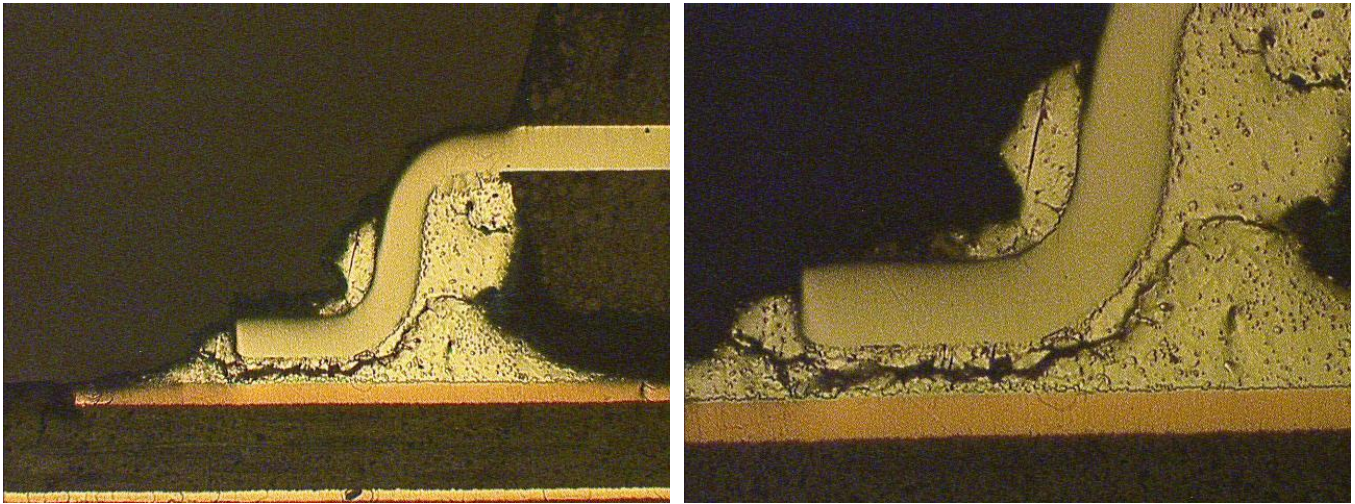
TSOP-50 Solder Joints, Board 107, Component U61, SN100C/Sn, Failed @ 1258 Cycles
